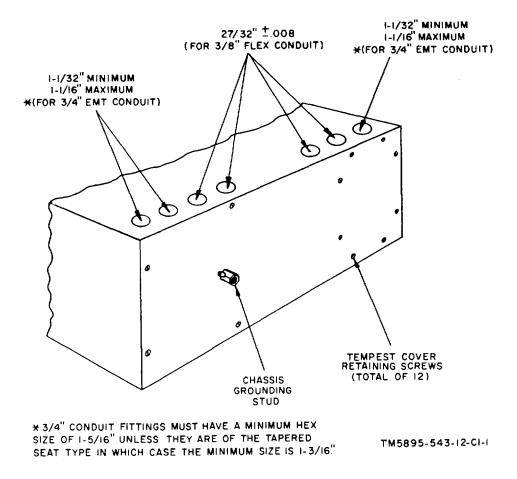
Top rear view of equipment case showing interconnection cable holes.
